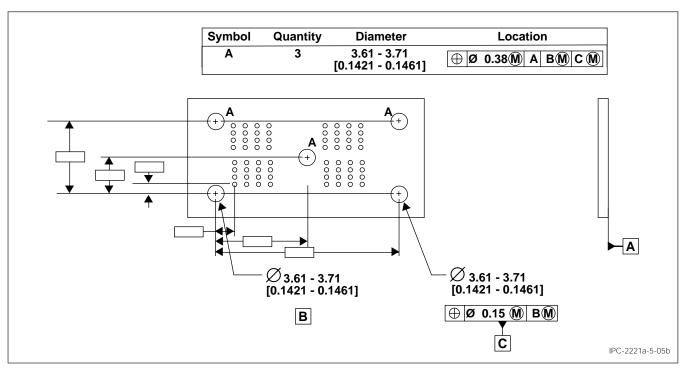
B Example of a Pattern of Tooling/Mounting Holes, mm [in]
